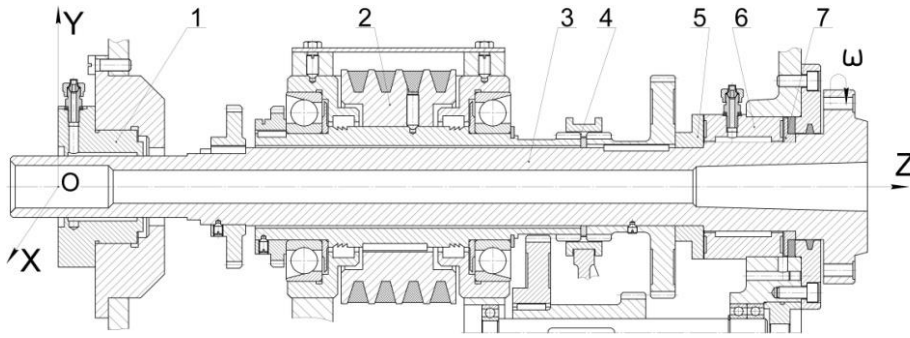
Constructive scheme of spindle lathe UT16A: 1, 6 – radial HB; 2 – pulley drive; 3 – spindle; 4 – gear coupling; 5, 7 – bushings of axial HB
